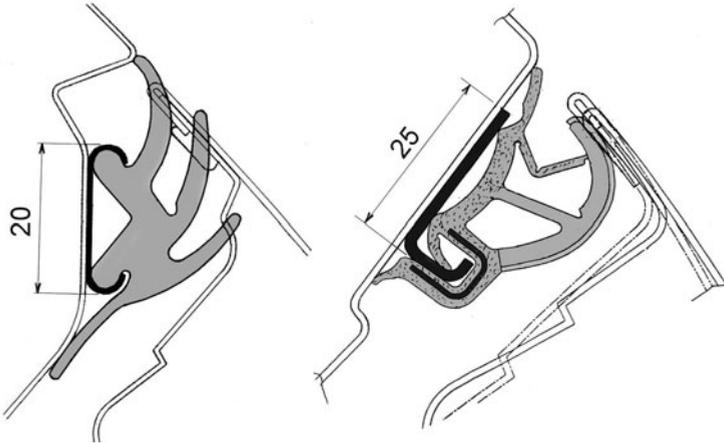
Examples of secondary strips fitting, clamped by U or L shaped profiles, welded to body side.
